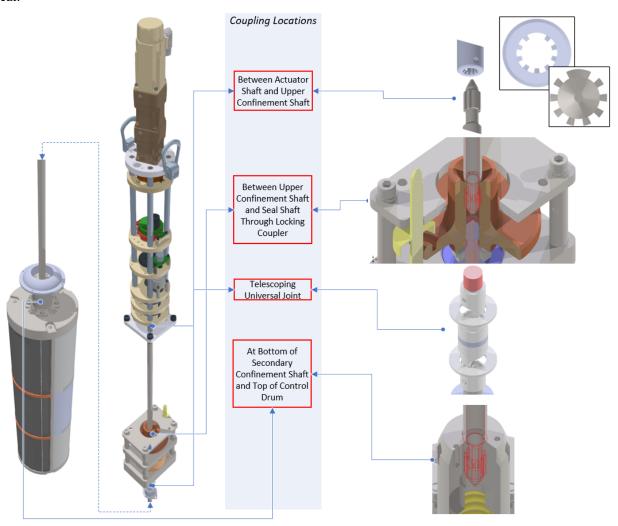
Shaft assembly couplings including five spline couples and a telescoping universal joint.
